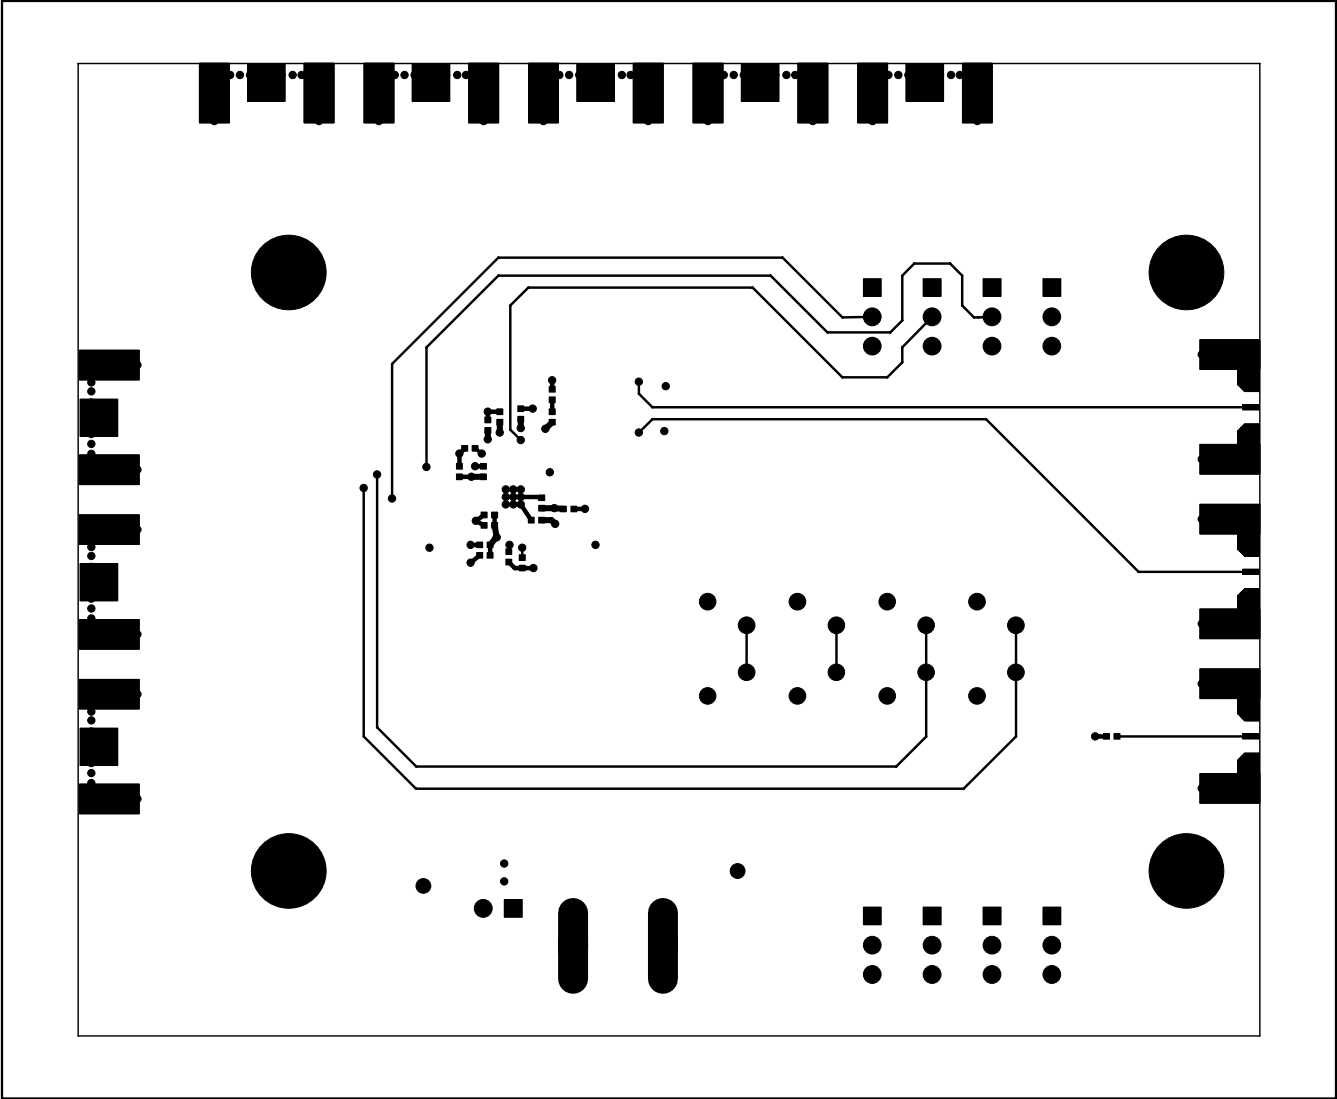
MAX3624 EV Kit Layout—Solder Plane
